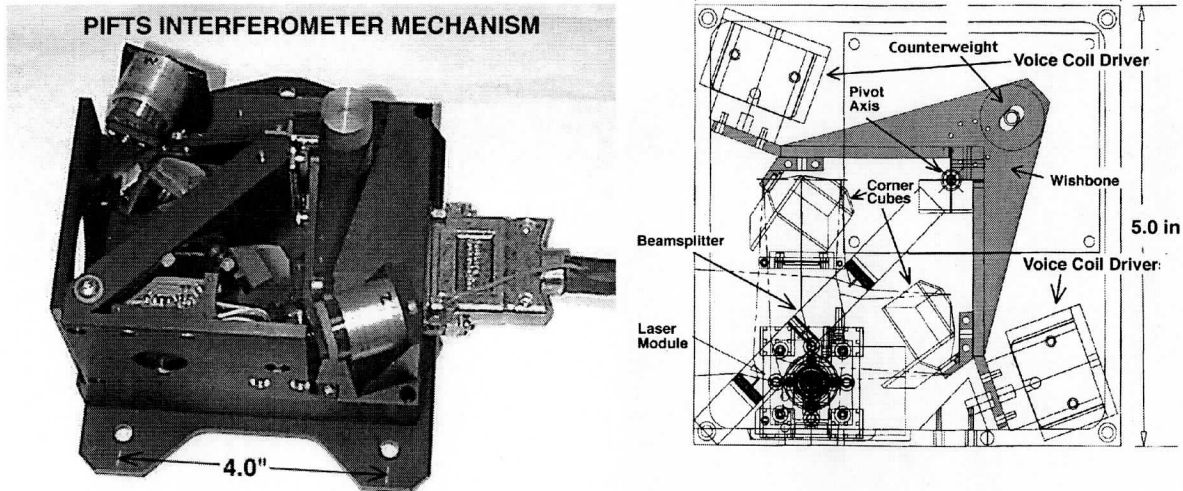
PIFTS interferometer assembly interior mechanism photograph (left) and mechanical drawing top view (right), for which the input from the scene is at the left and the output to the lens is at the bottom.
